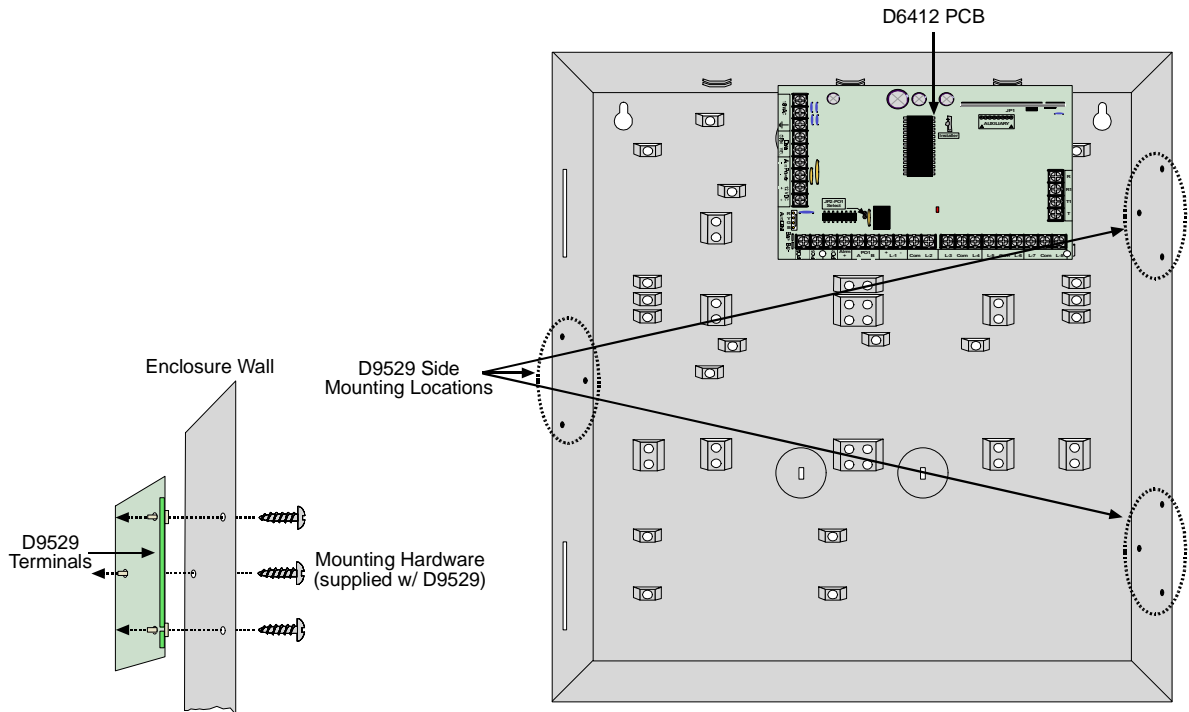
D9529 - Control Panel Enclosure Side Mounting
